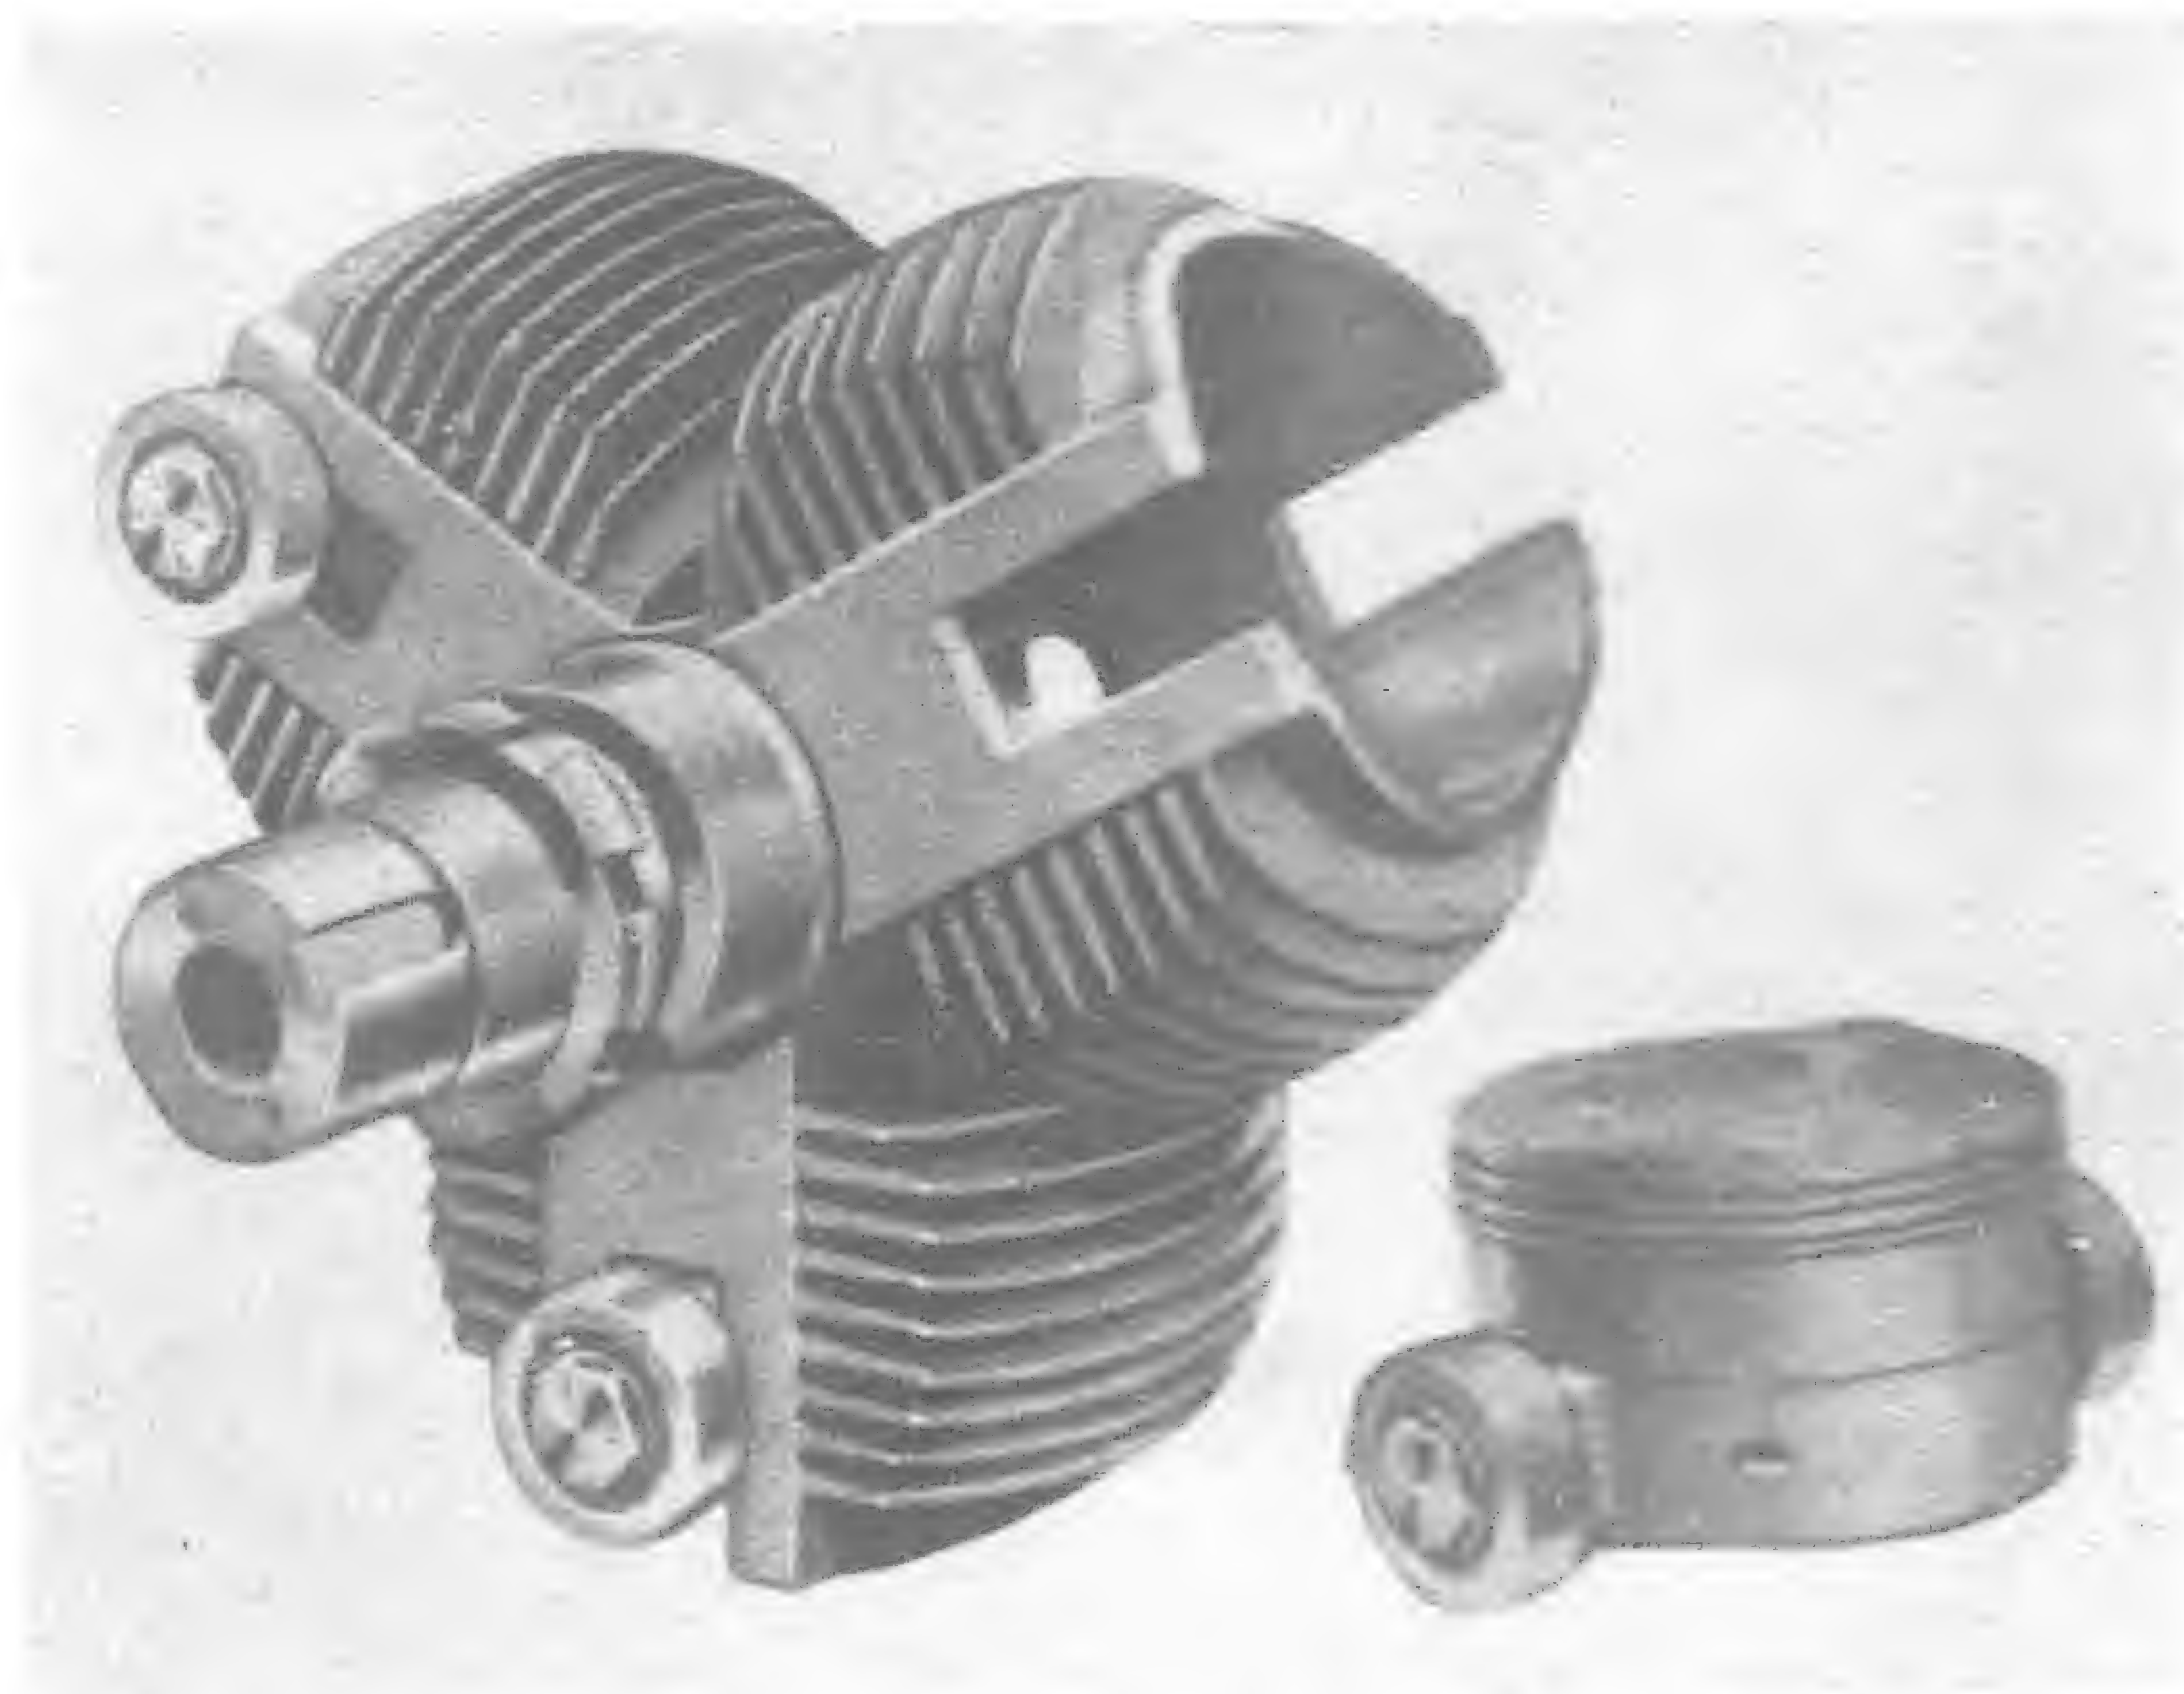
Cylinder Body and Piston of the H.S.B. Air Compressor
